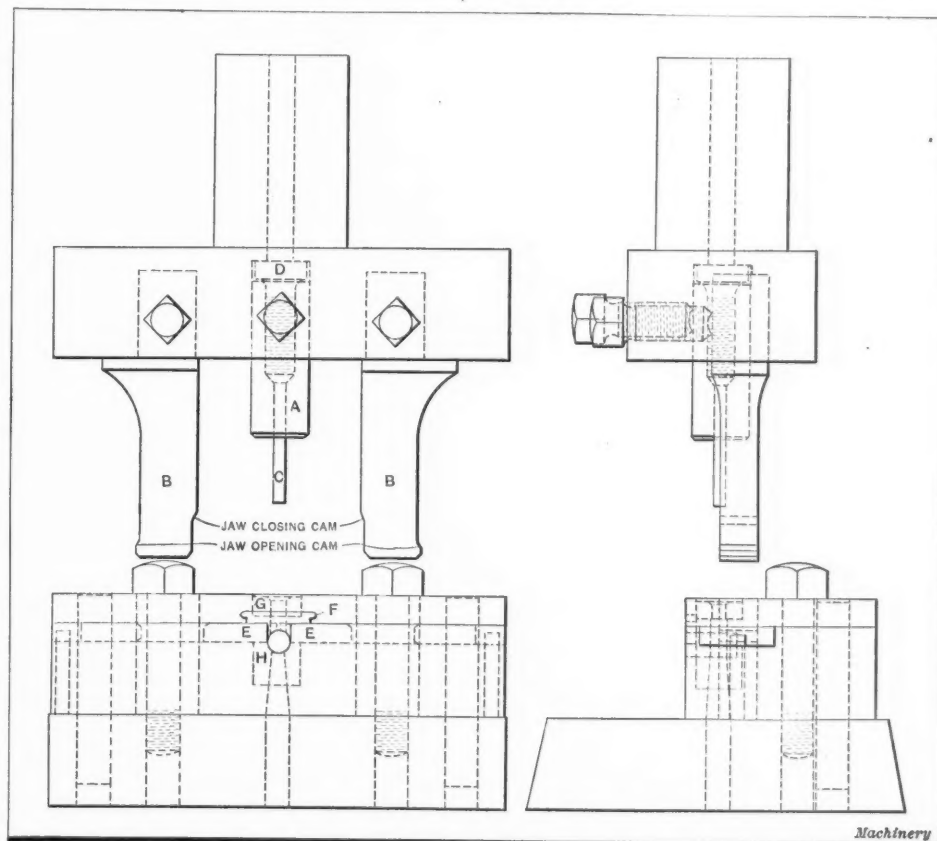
Details of Design of the Rivet Piercing Punch and Die
